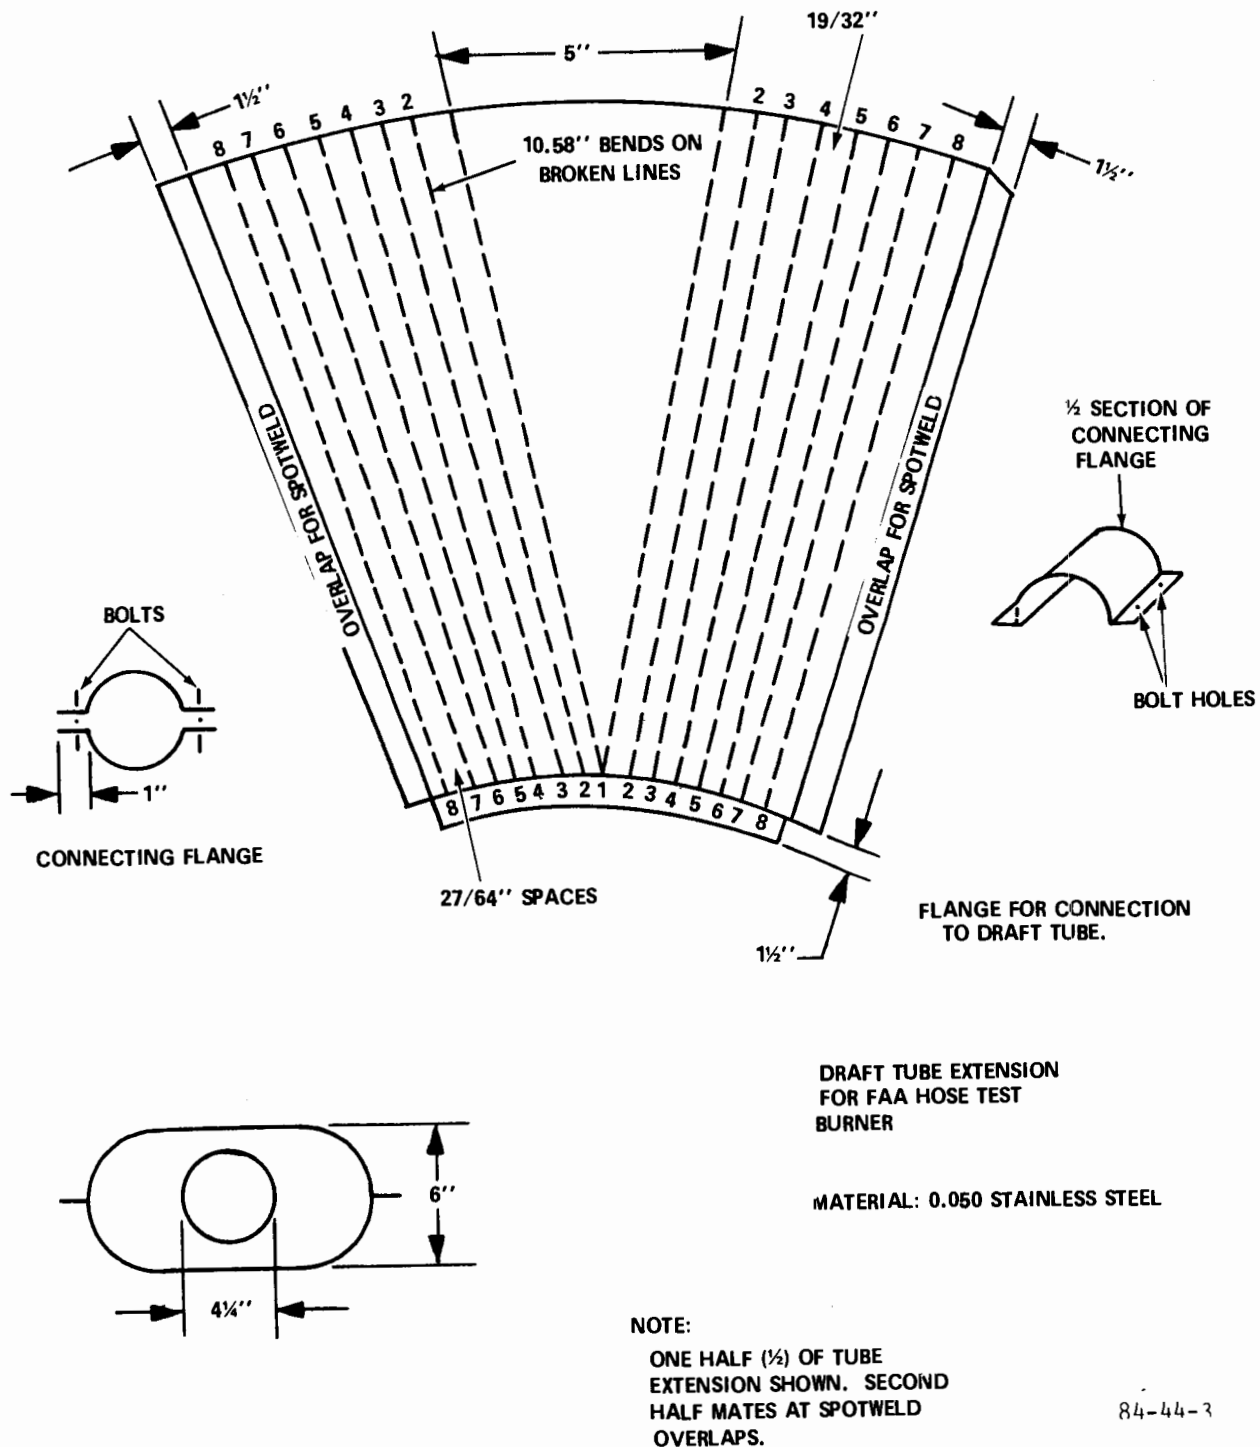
DRAFT TUBE EXTENSION FOR FAA HOSE TEST BURNER
